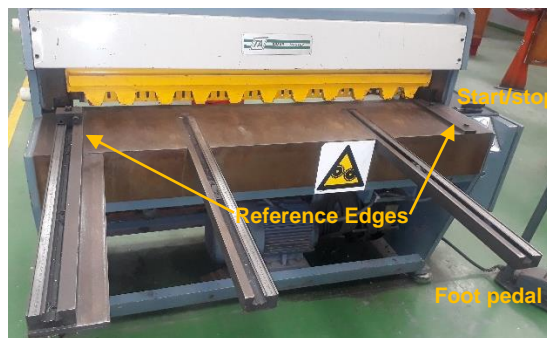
Truecut Mechanical Shearing machine QH11D-3.5 x1250
